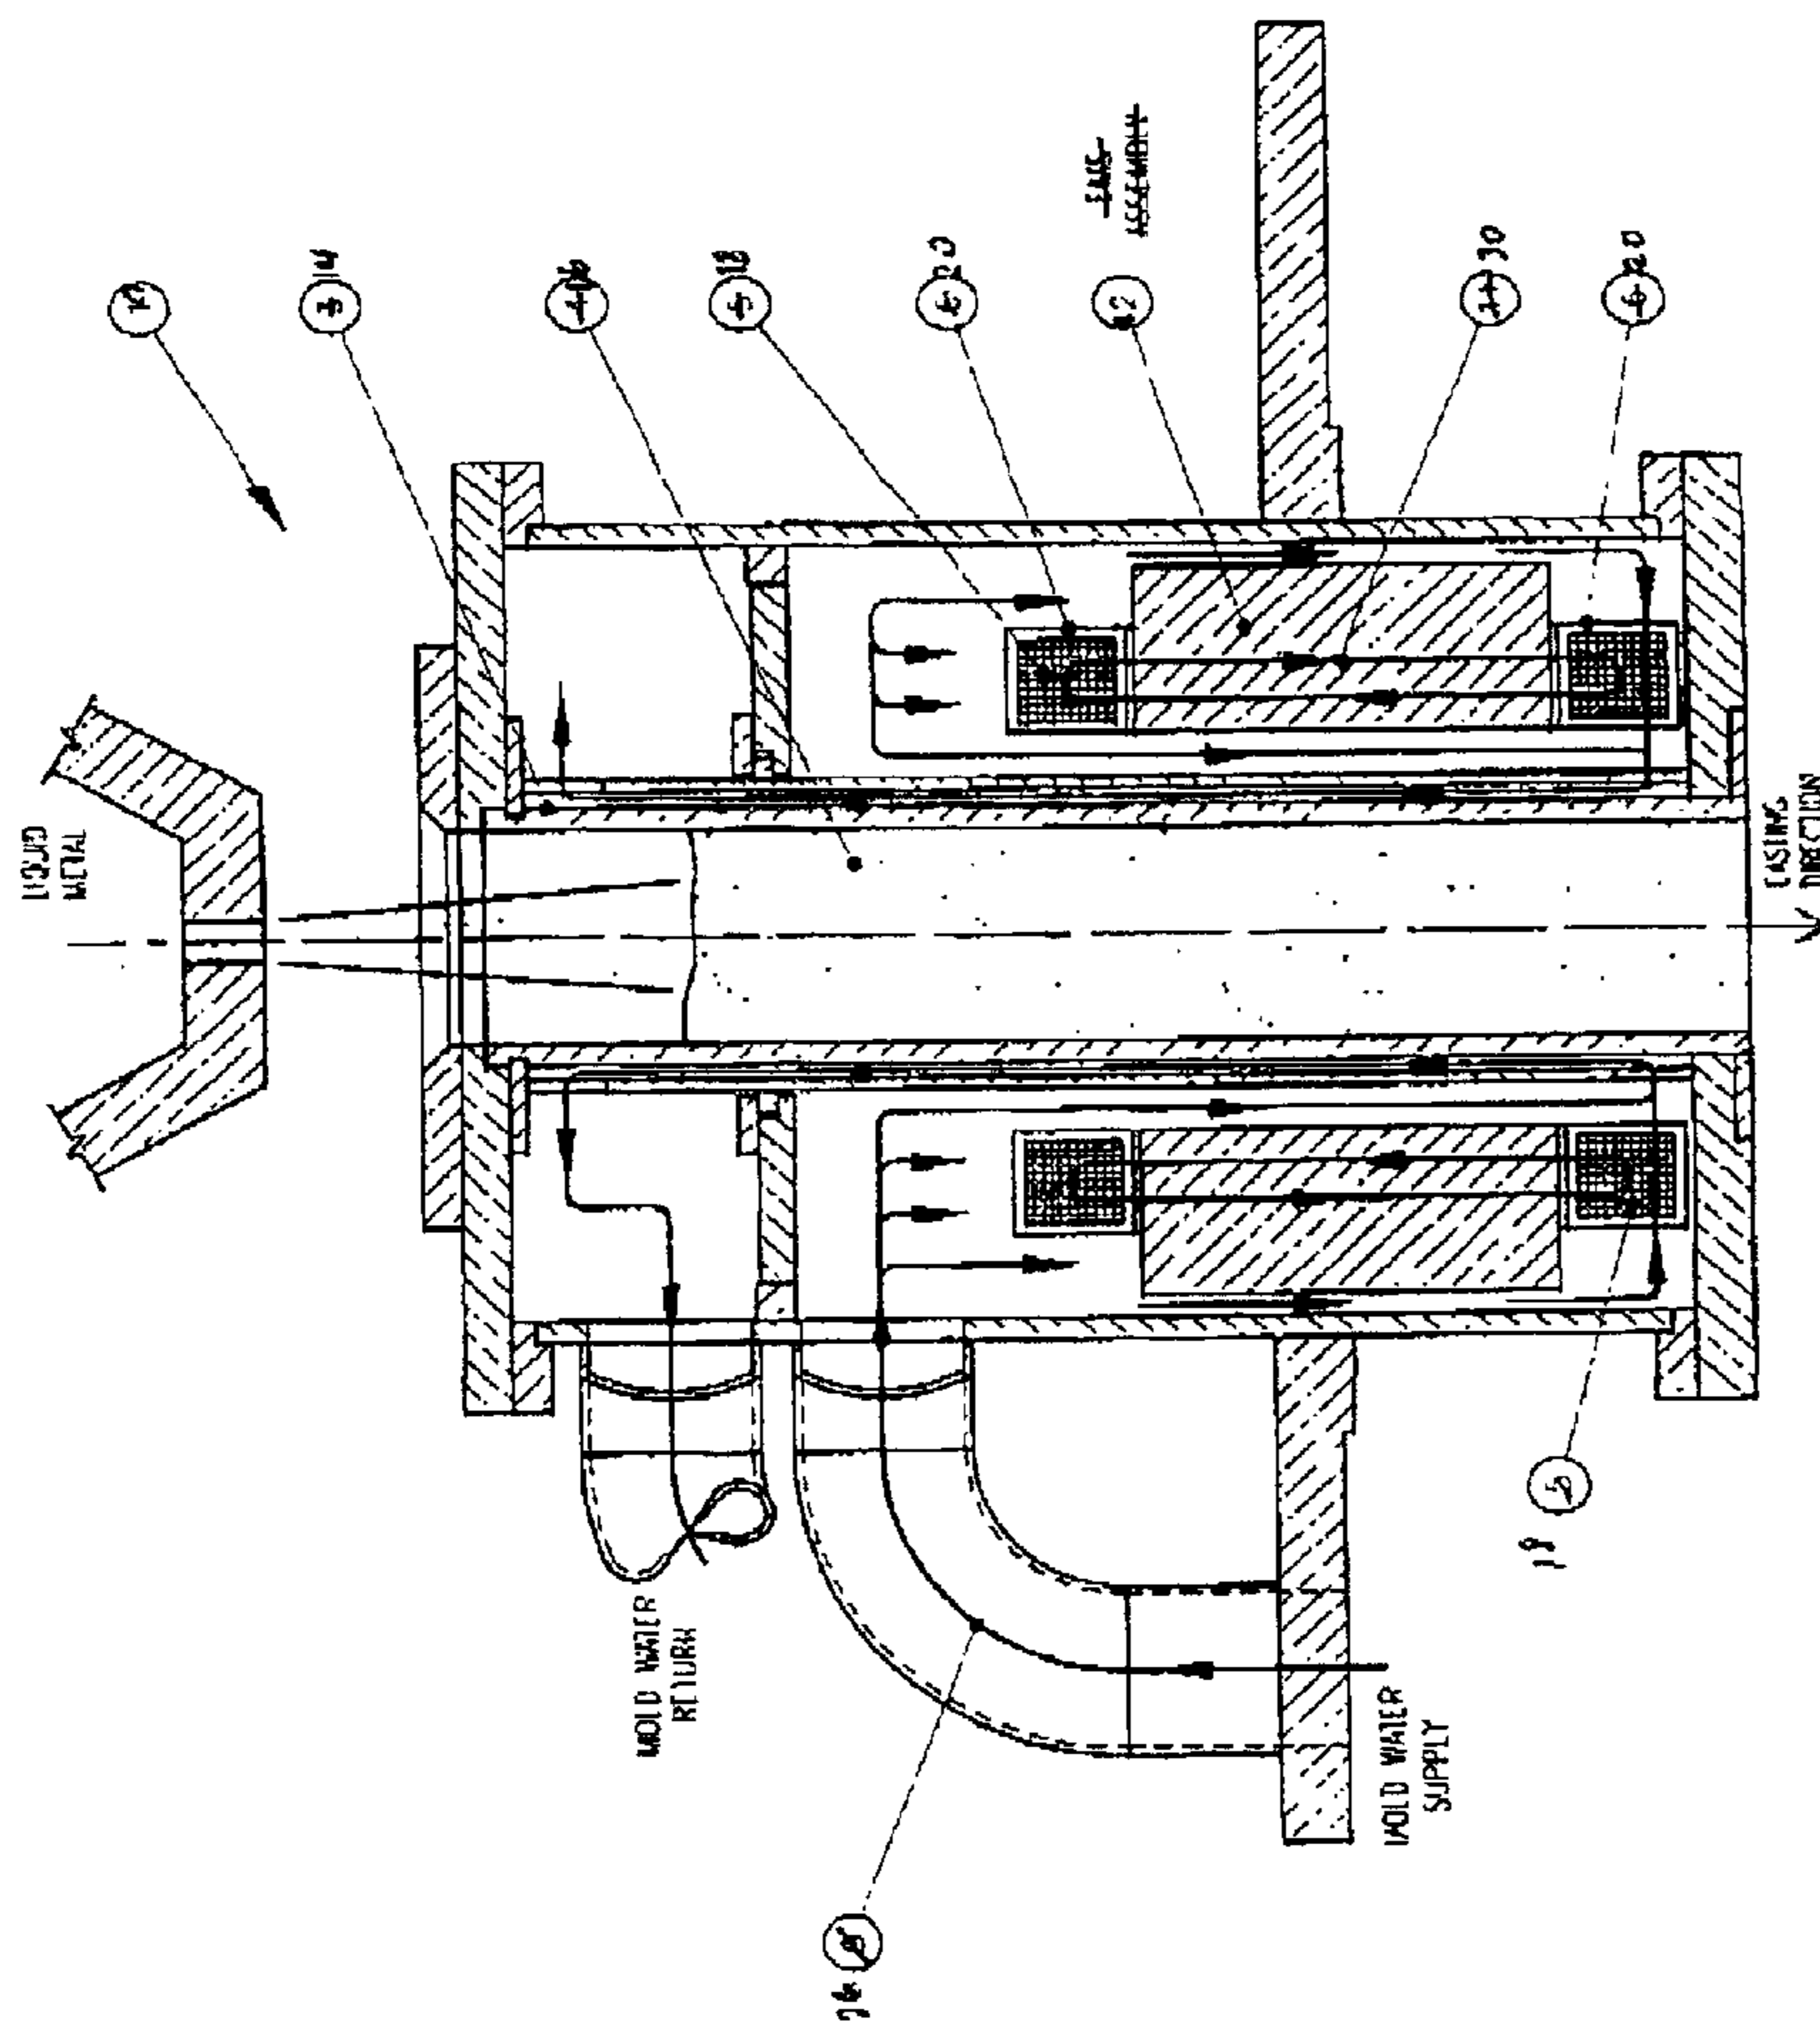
SCHEMATIC OF EMS ARRANGEMENT IN THE MOLD HOUSING IN ACCORDANCE WITH ONE EMBODIMENT OF COOLING WINDINGS WITH FERROFLUID
